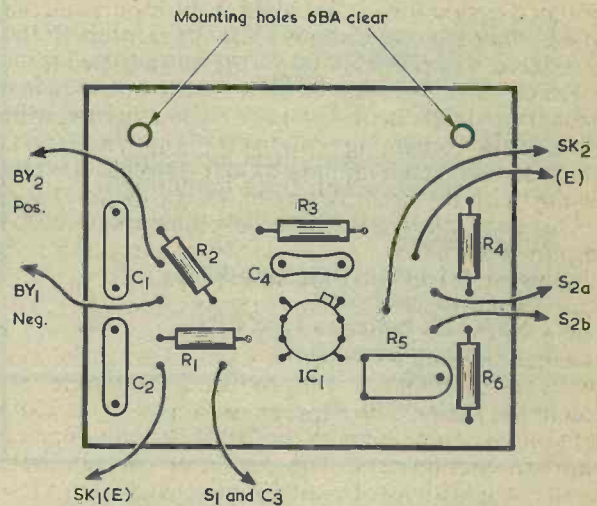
The printed circuit layout pattern. This will take either a CA3130T or a CA3130E.
